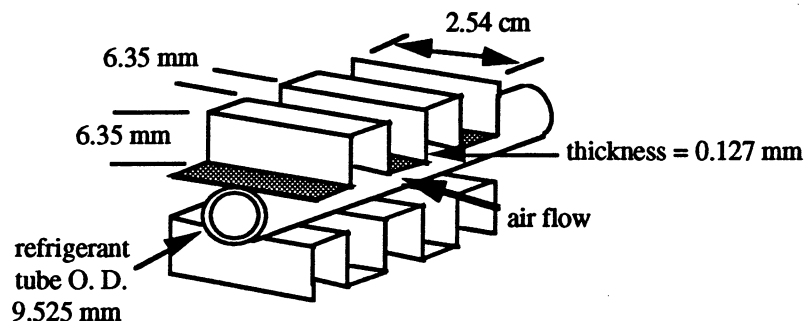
Fin dimensions of optimized evaporator fin/tube section
